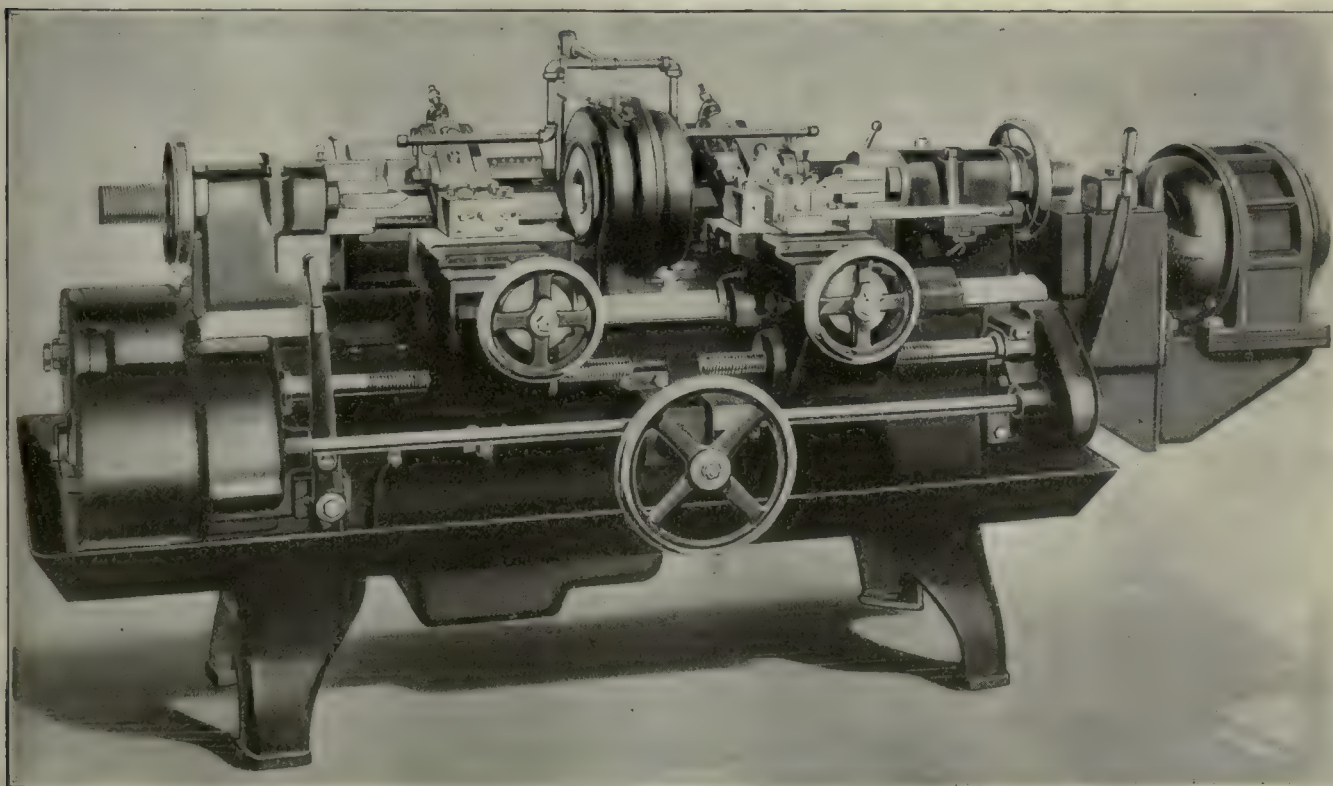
GREENLEE 36-IN. DOUBLE-END, CENTER-DRIVE SHAFT LATHE
